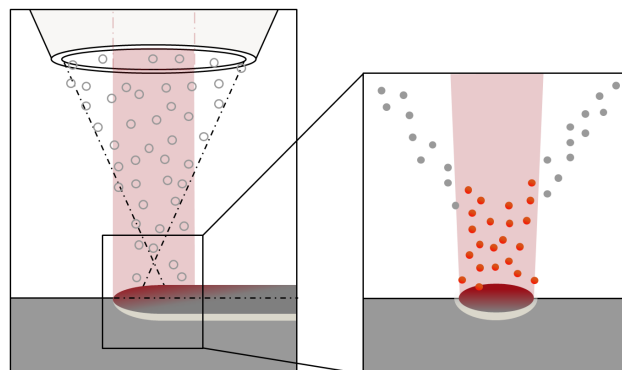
Extreme High-Speed Laser Application (EHLA) for the Material-Bonding Coating of Tool Materials
